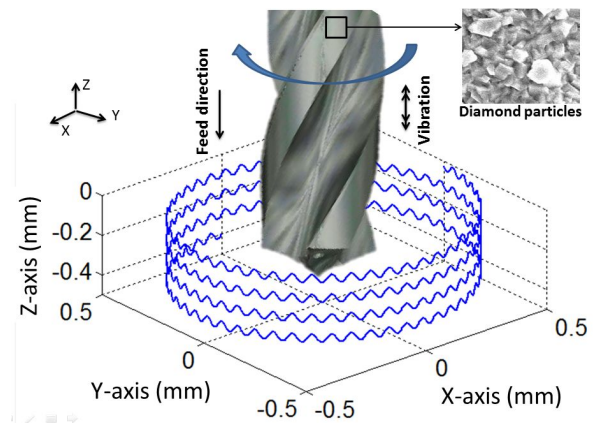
Trajectory of a single point on the edge of cutting tool for RUD
